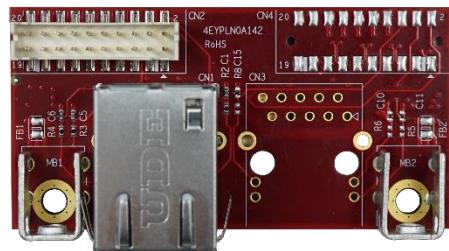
Mounting Hole Daughter Board Picture (EMPL-G102-C3/W3)
